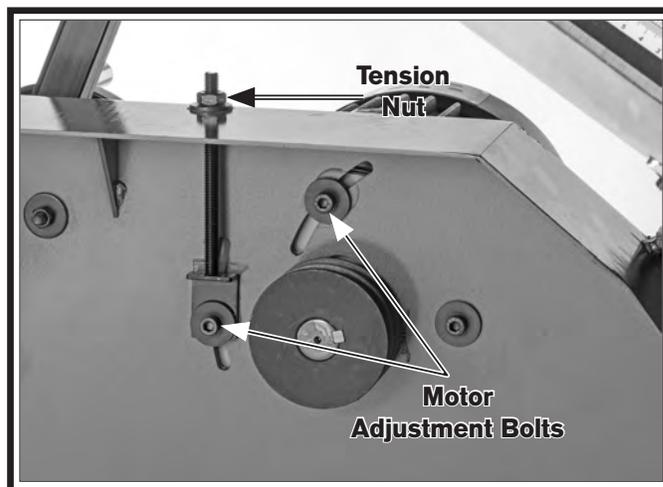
Location of V-belt tension controls (wheel removed for clarity).
